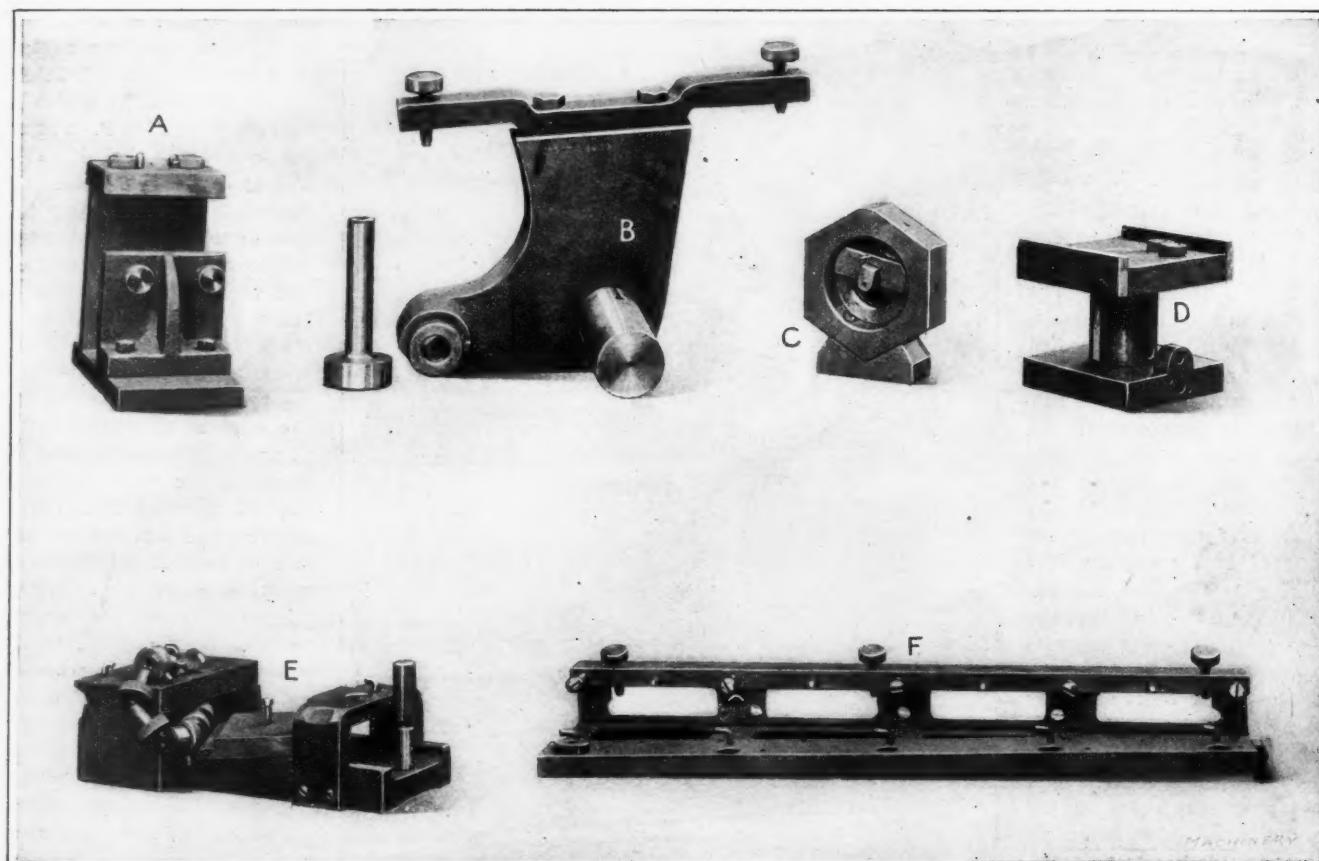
A, Drill Jig for Cross-slide; B, Drill Jig for Index Lever Bearing on Bed; C, Drill Jig for Adjusting Nut for Spindle Rear Bearing; D, Drill Jig for Lock Bolt Cam; E, Drill Jig for Chuck Operating Slide and Shoe; F, Drill Jig for Cylinder Carriage Gib
